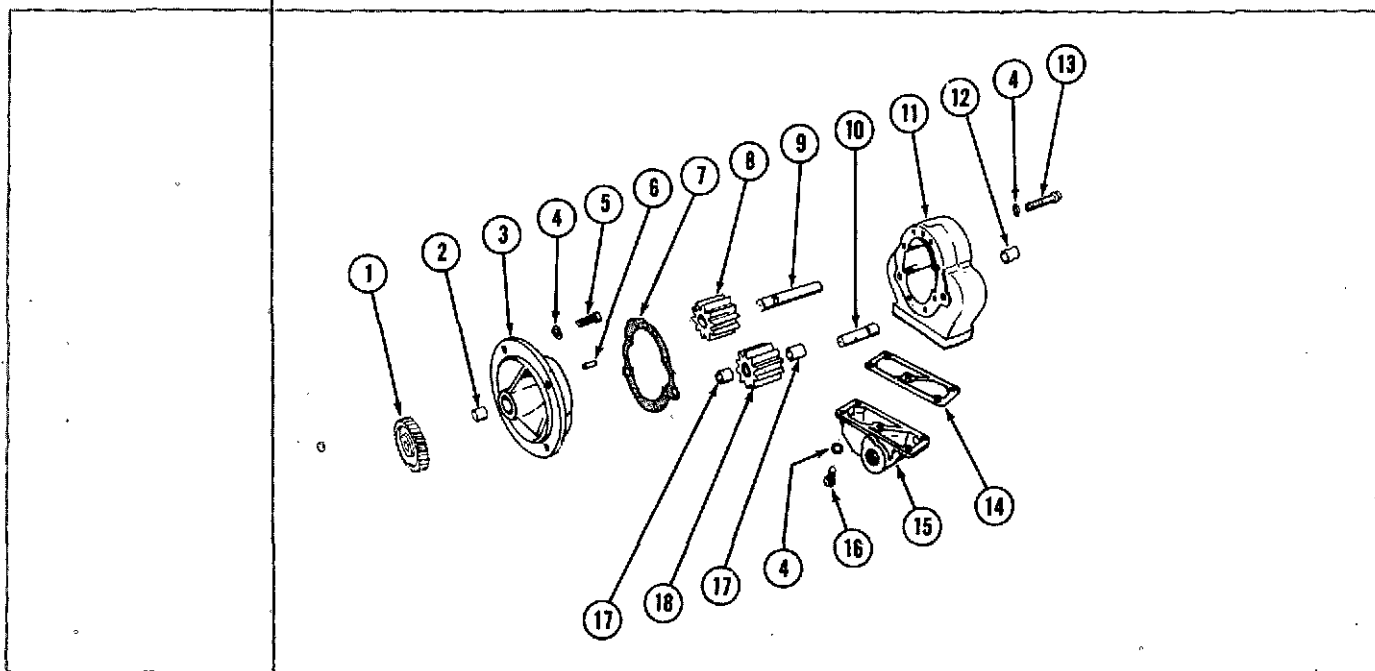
, V40734. Scavenger oil pump-exploded view
